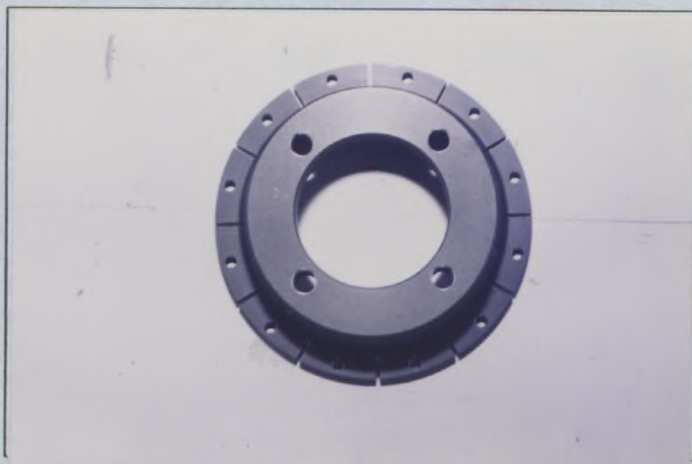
PROTECTION SHIELD FOR DISC
